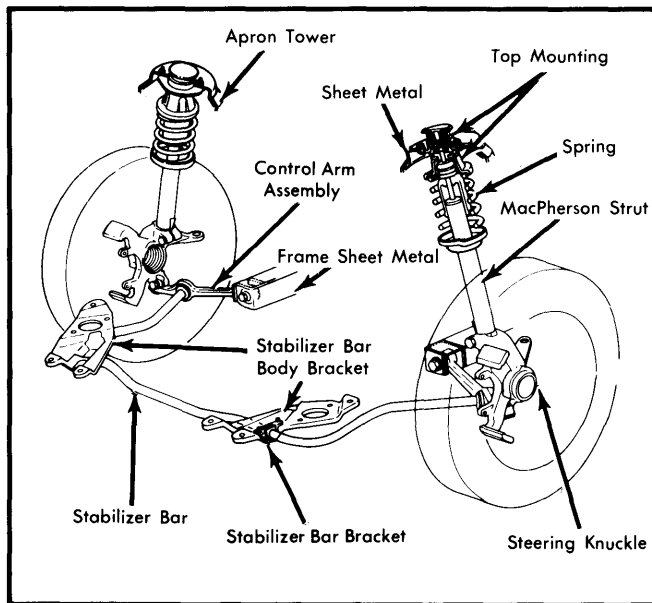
Exploded View of Ford Motor Co. MacPherson Strut Suspension
